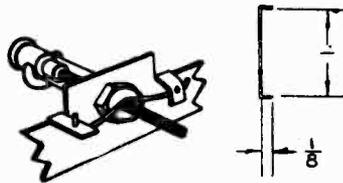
, left, shows the music wire spring applied to the adjusting screw.
